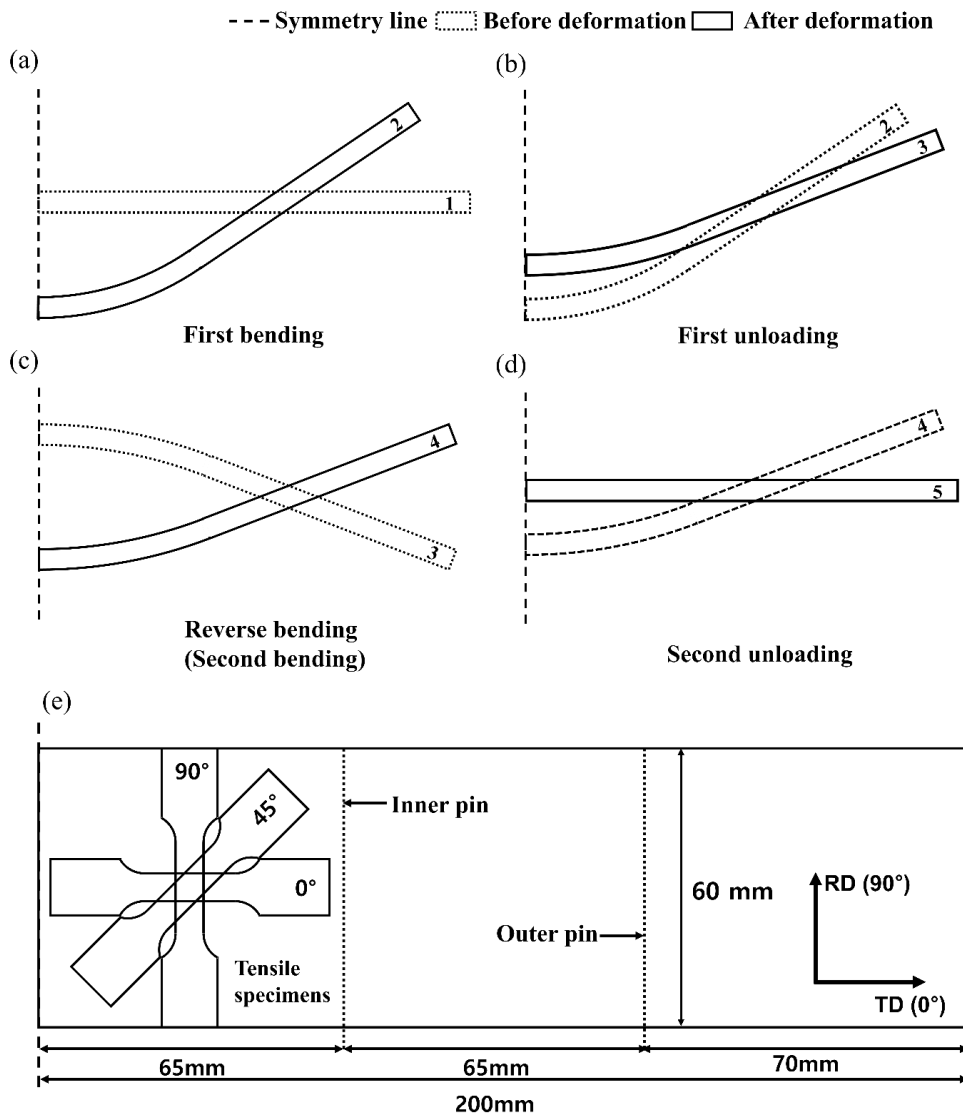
Schematic illustration of the BRB test: (a) bending, (b) first unloading, (c) reverse bending, (d) second unloading, and (e) locations of tensile specimens taken out from the BRB test specimen.
